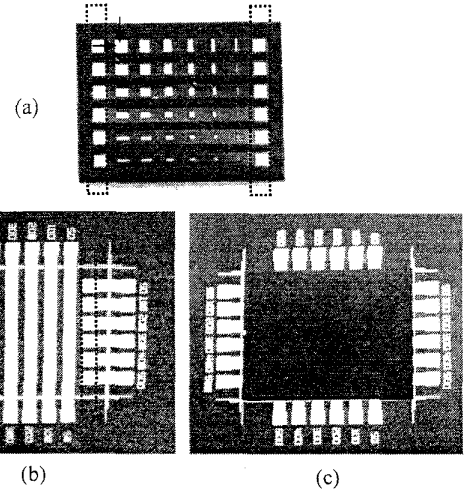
Microphotographs of flip-chip assembly: (a) flip-chip; (b) substrate; and (c) their assembly used for the contact resistance measurement of the bumps.
